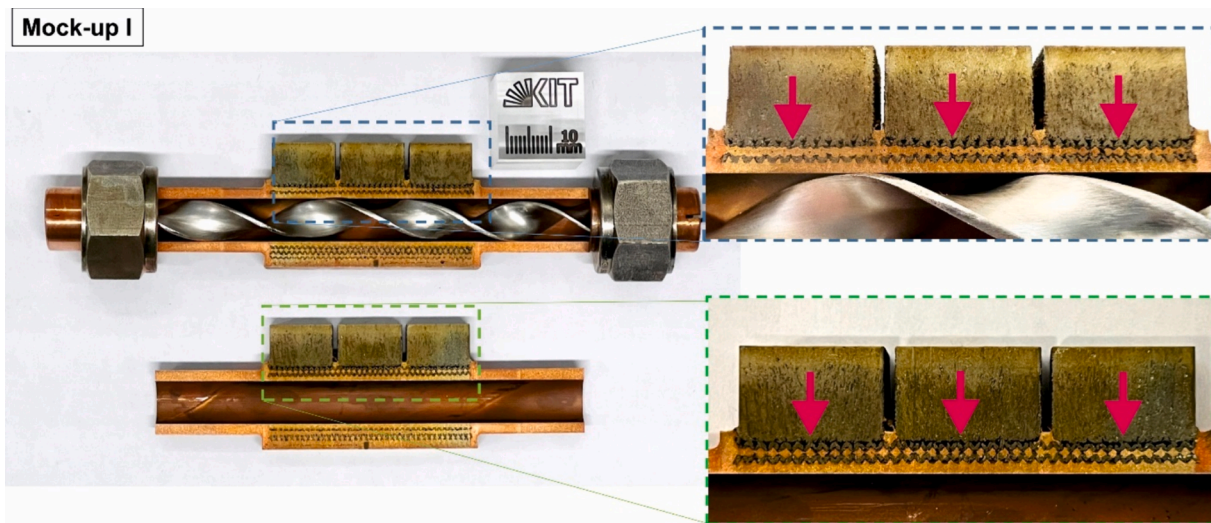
Cross section of mock-up I after completed GLADIS HHF campaign (300 cycles).
